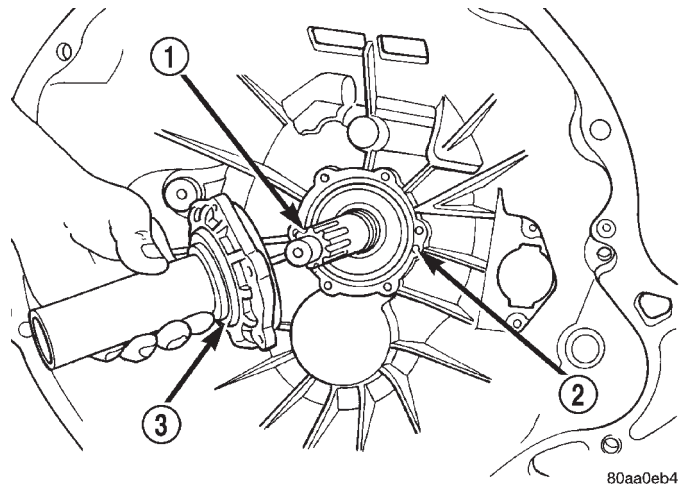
Installing Input Shaft Bearing Retainer—Typical
